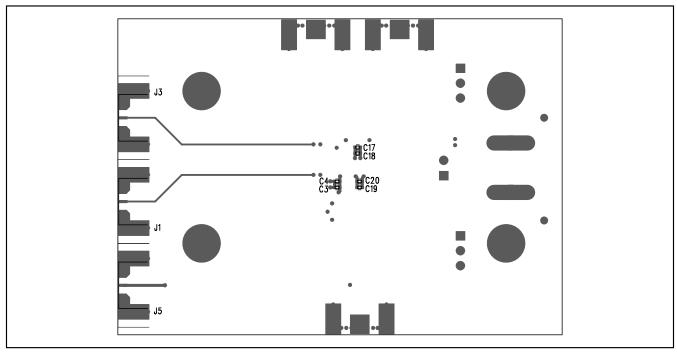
MAX3622 EV Kit Assembly Drawing—Bottom Side
